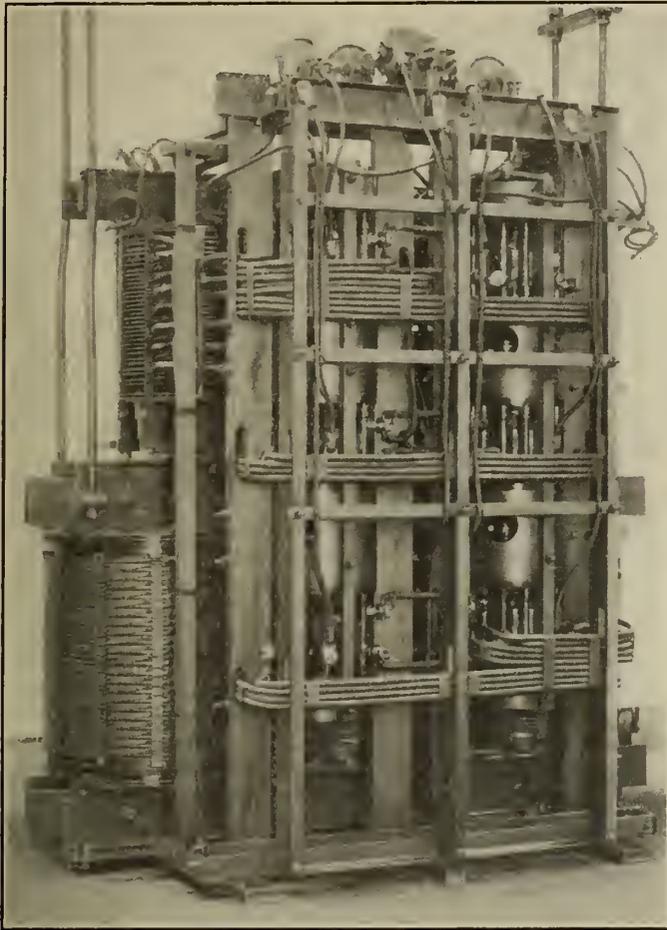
Type LR-9 Load Ratio Control Regulating Transformer—Assembled Core, Coils and Control.
